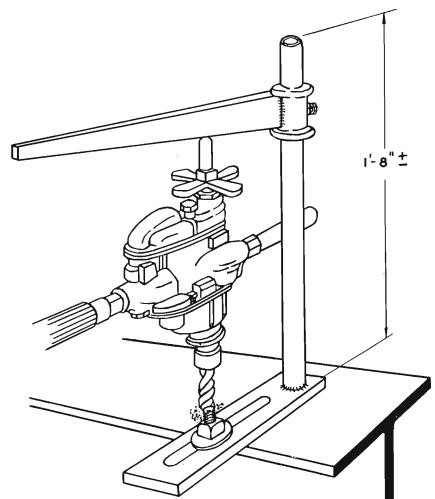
Adjustable clamp or "old man" used when drilling steel with pneumatic drill.
